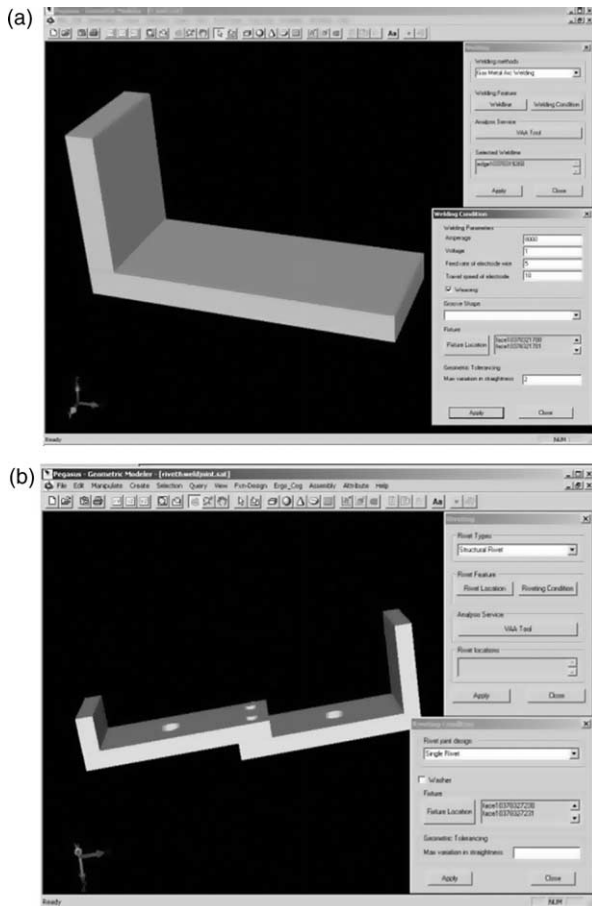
Joining method specification and joint feature formation. (a) Welding; (b) riveting.
